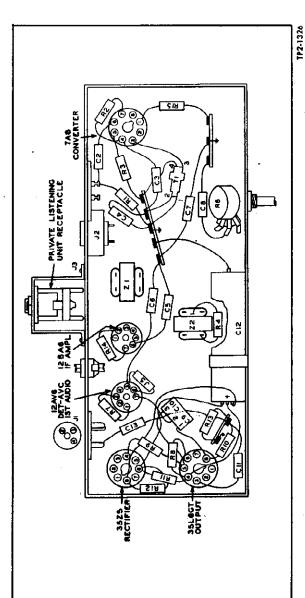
Model 52-550, Base View, Showing Symbolized Chassis
